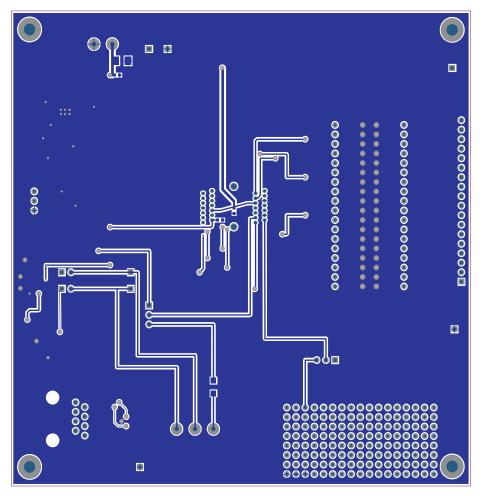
BUF16821EVM PCB Bottom Layer (Solder Side)
